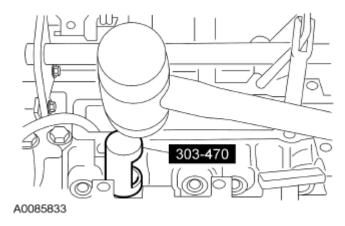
Installing Valve Seal Courtesy of FORD MOTOR CO.
